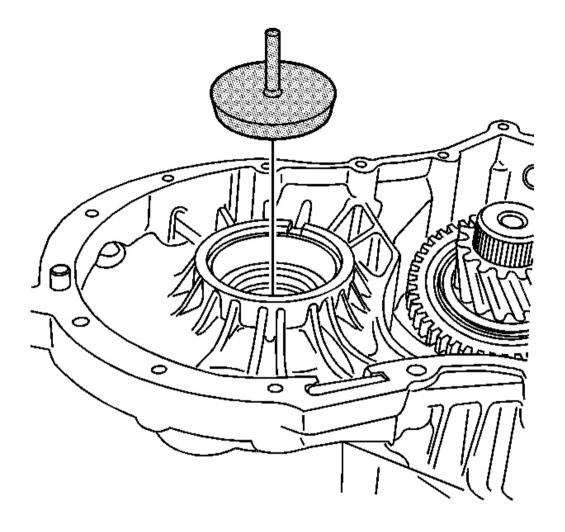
Left Differential Side Bearing Race & J 44388-2 Courtesy of GENERAL MOTORS CORP.
